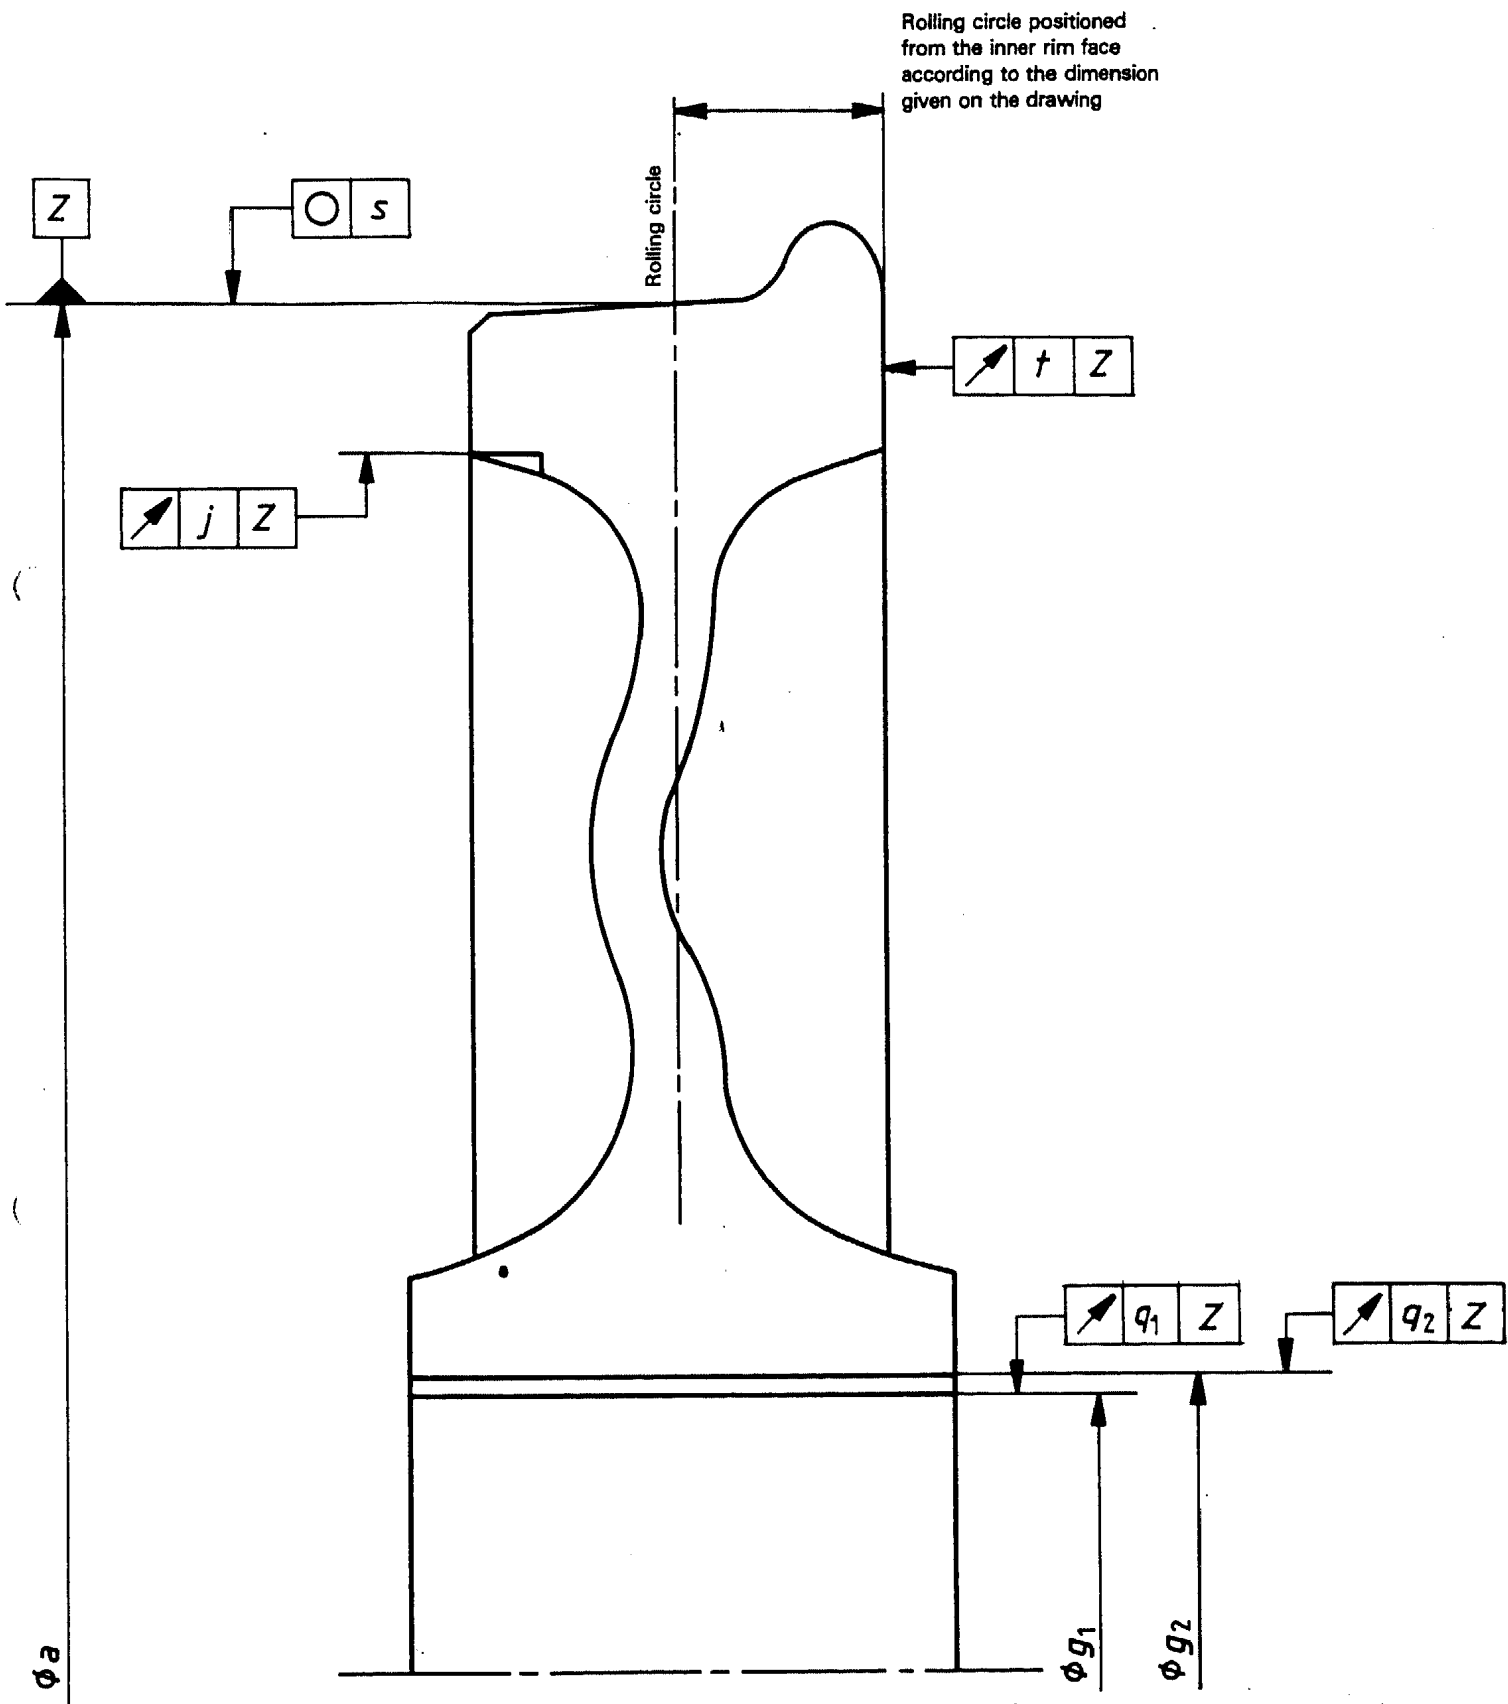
Specific geometrical tolerances (see 5.1.1.3.2) specified in table 5, for "finished" and "ready for assembly"¹⁾ forged, rolled or cast solid wheels.
